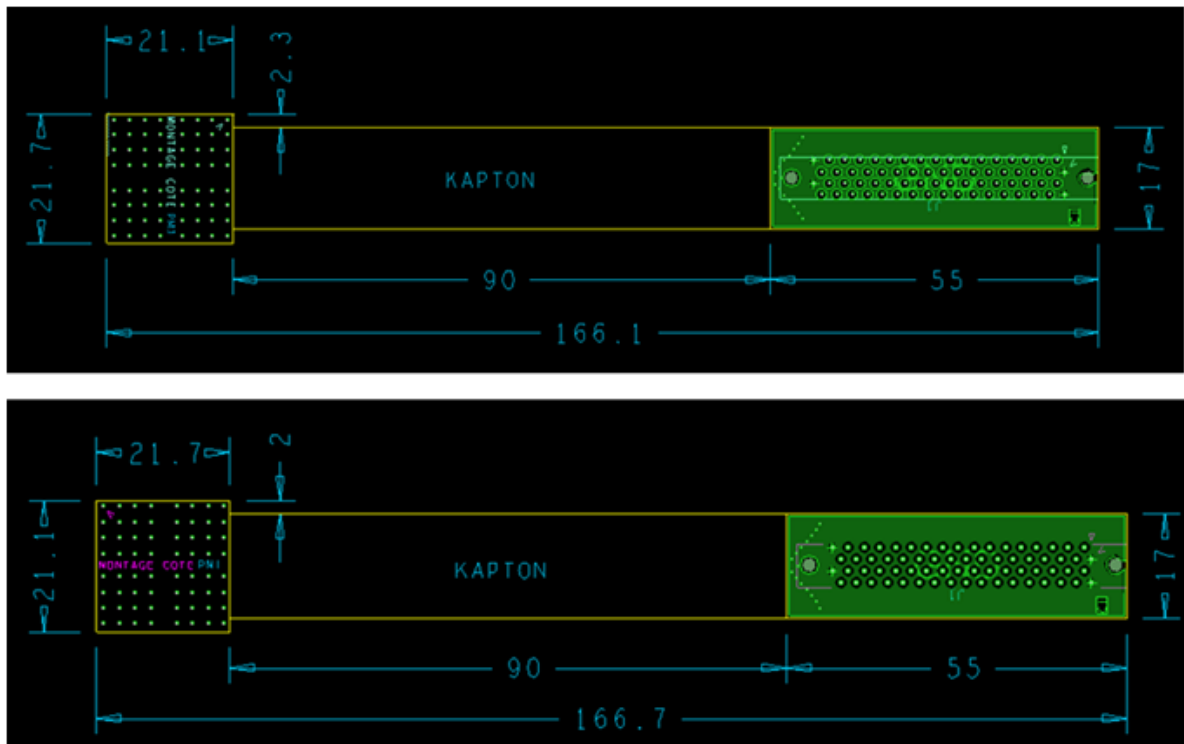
Routing drawing (with board dimensions) of the two types of EC-anode.
